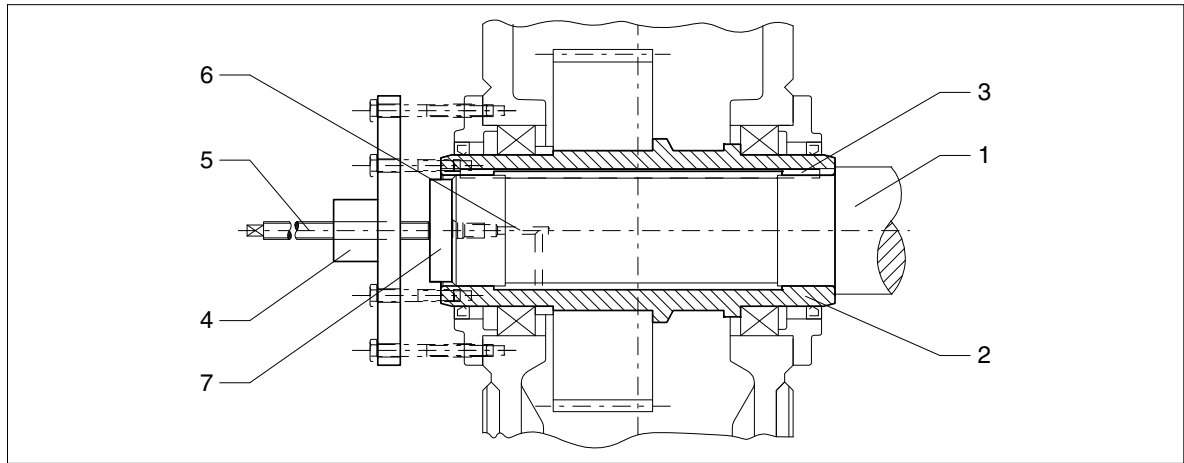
Hollow shaft with parallel keyway, demounting with hydraulic lifting unit ("Lukas")
